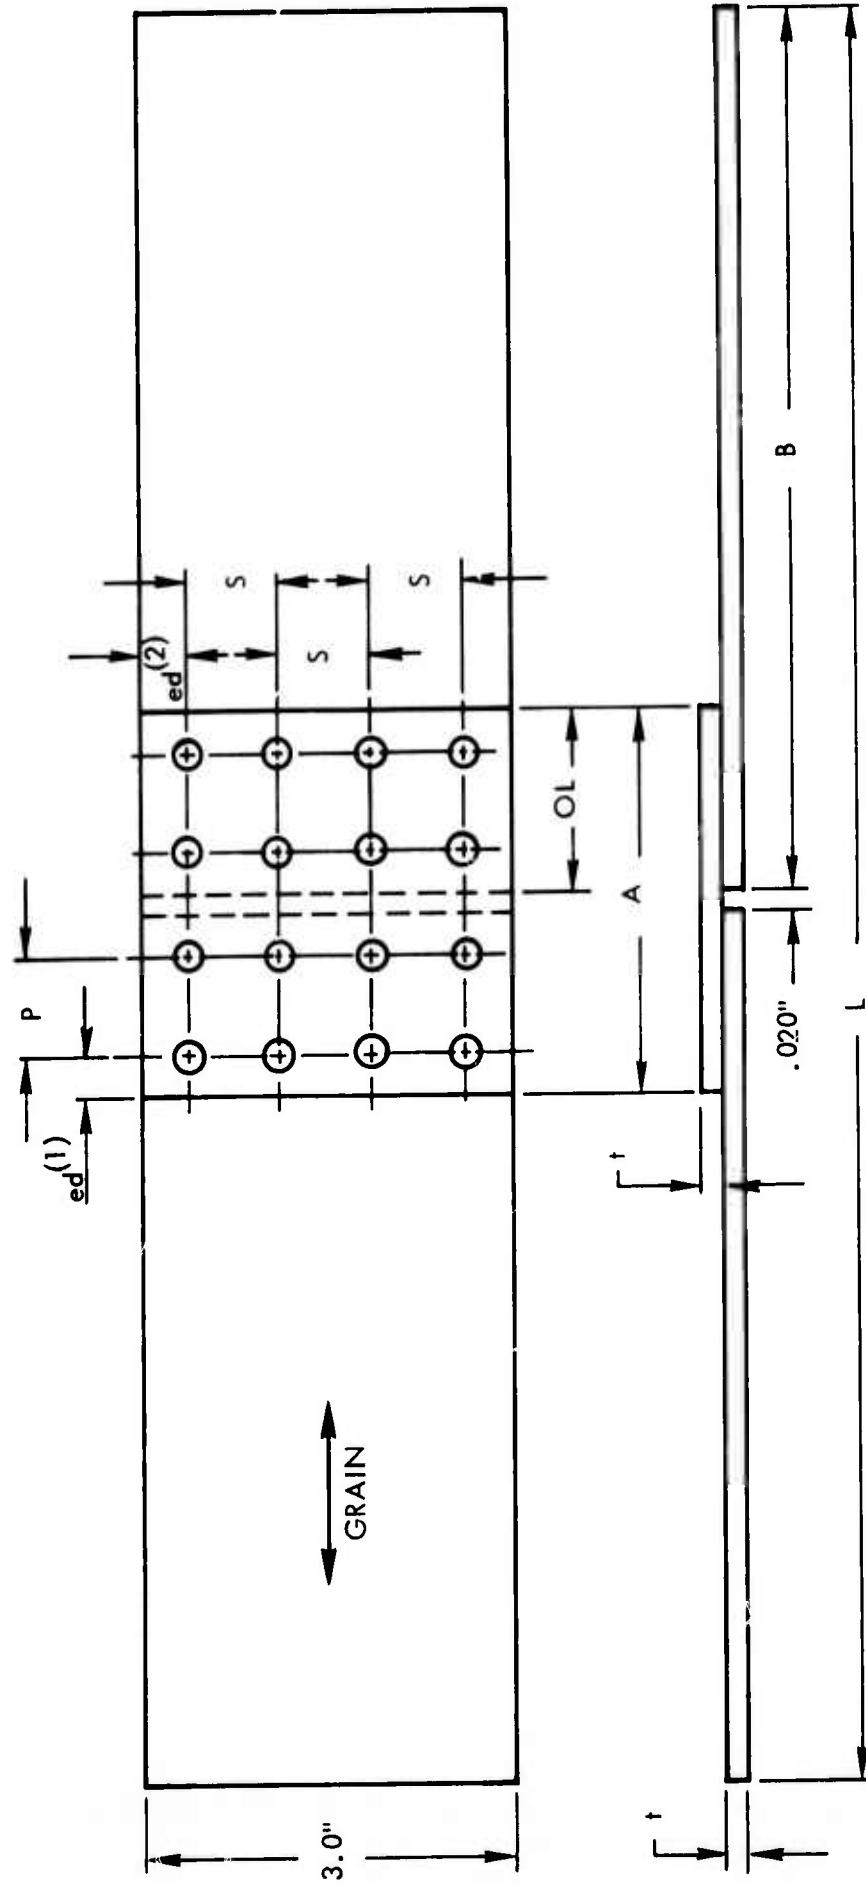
DOUBLE ROW WELD PATTERN SPECIMEN
